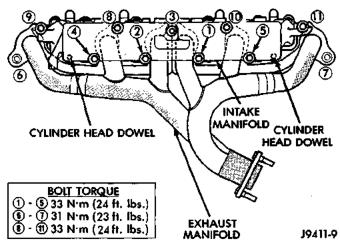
Intake/Engine Exhaust Manifold Installation 4.0L Engine
